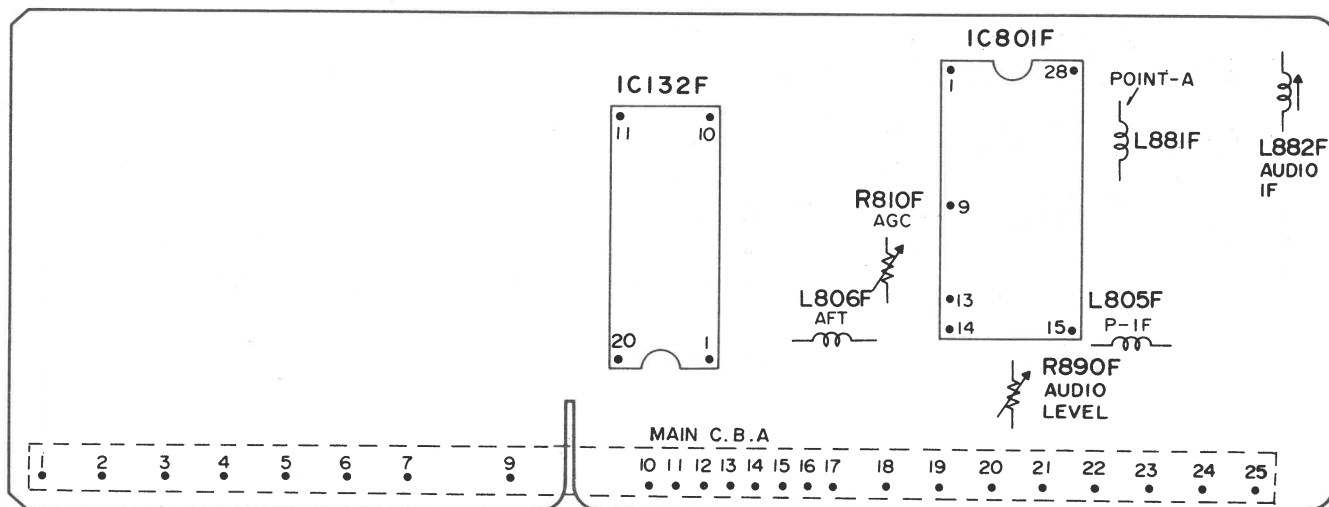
Demodulator/U-V Tuner Test Point/Control Location (Component Side)
